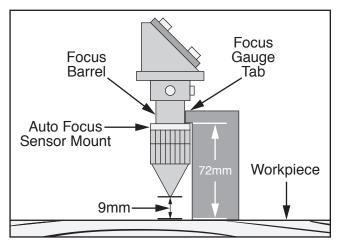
Focus gauge resting on workpiece and auto focus sensor mount.
